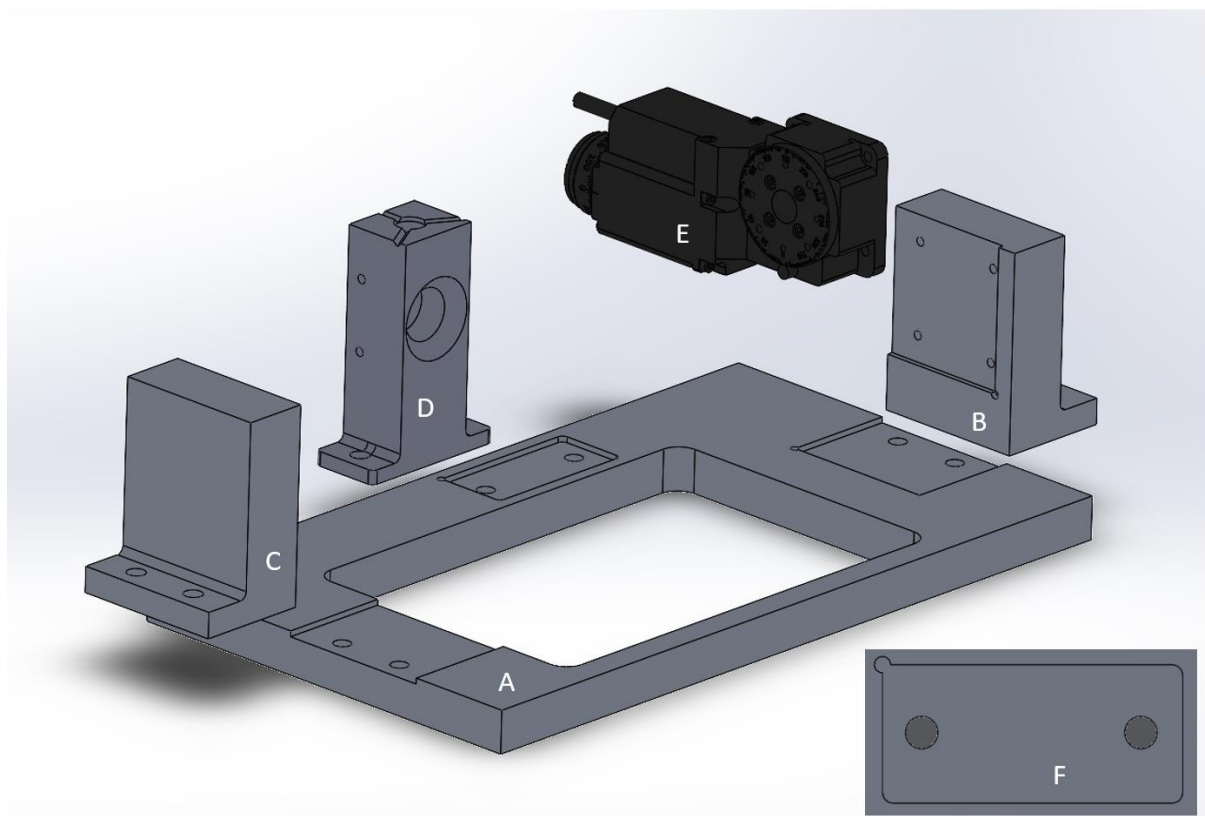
Alignment pockets on the fixture: A: Base, B: Front bracket w/ pocket, C: End bracket, D: Laser mount, E: Elevation rotary stage, F: Detailed view of the laser mount pocket, highlighting the alignment corner in the top left of the pocket.
